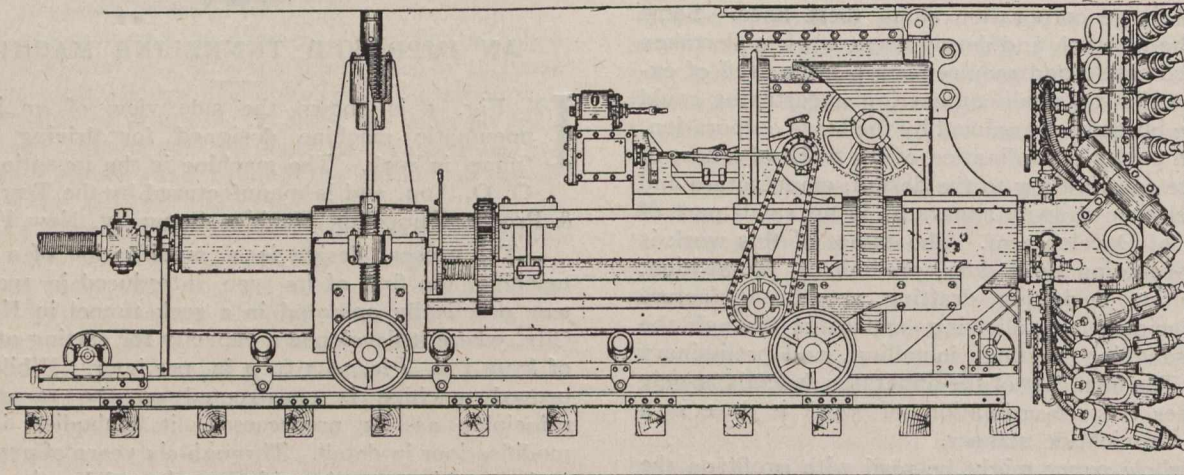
Side View of 8-ft. Tunneling Machine.
